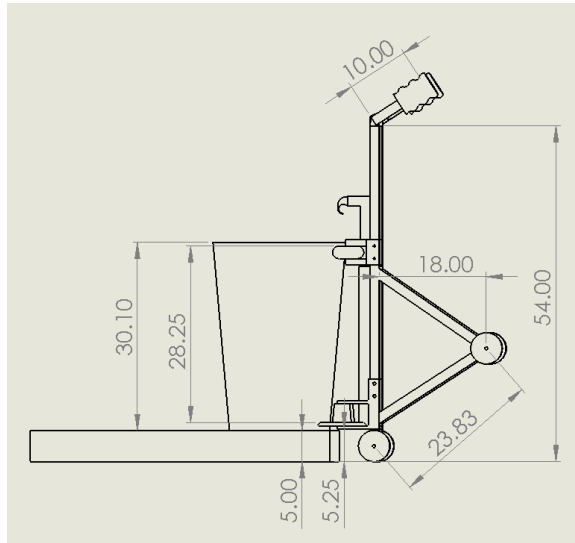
HAND TRUCK DIMENSIONS WITH PALLET
